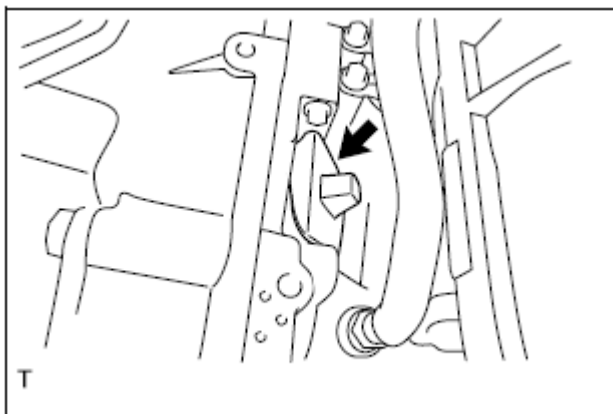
Identifying Flywheel Housing Under Cover (Transmission A/T)
